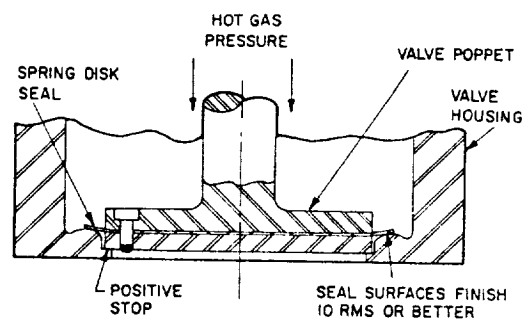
Turbine hot gas throttle valve with typical rotating-type dynamic seals.
